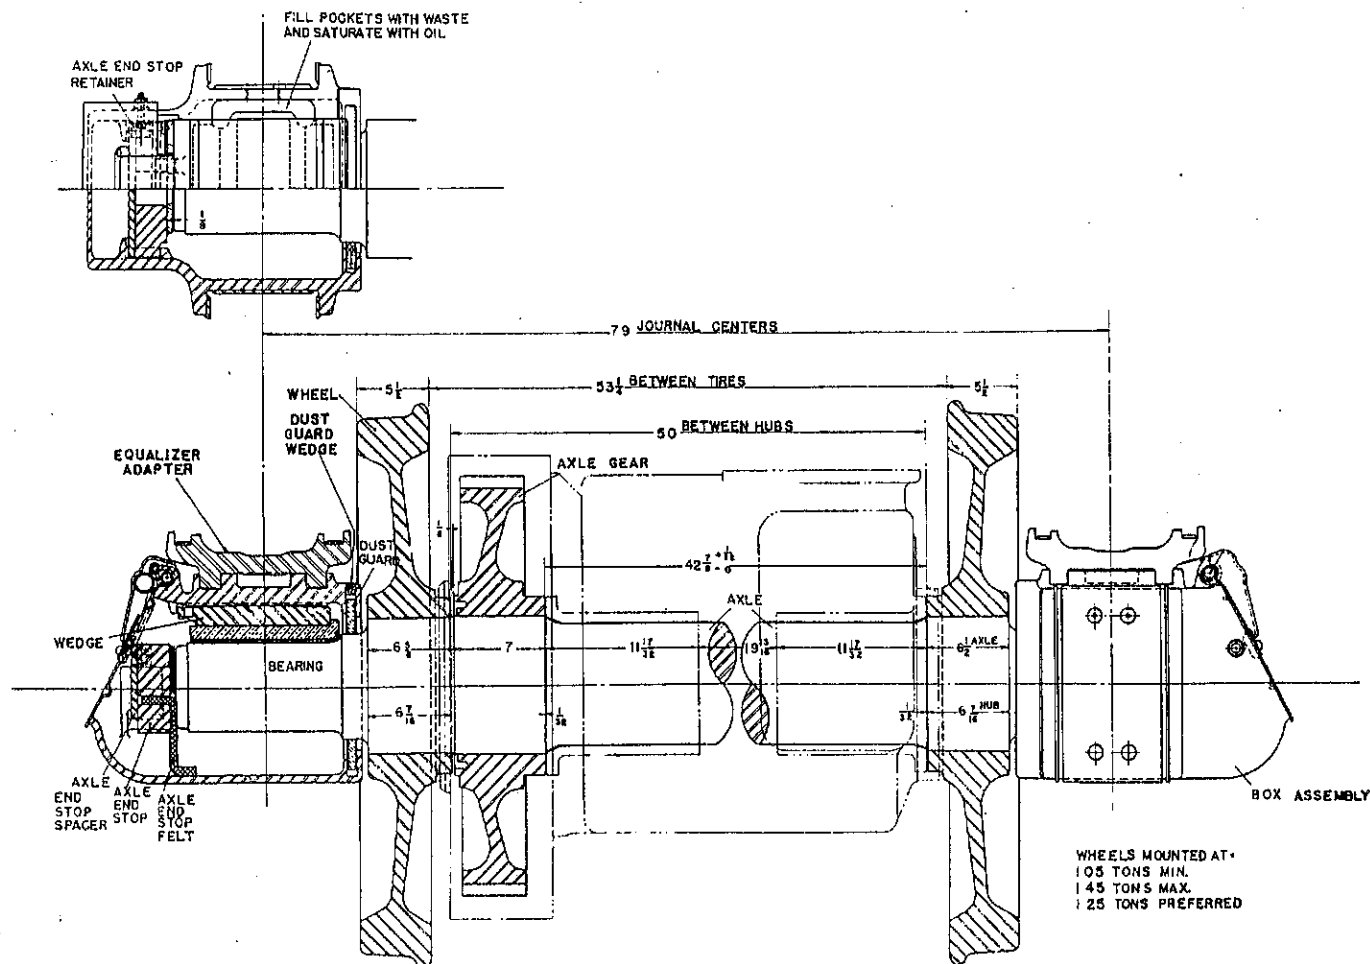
WHEEL, AXLE AND BOX ASSEMBLY WITH FRICTION BEARINGS
